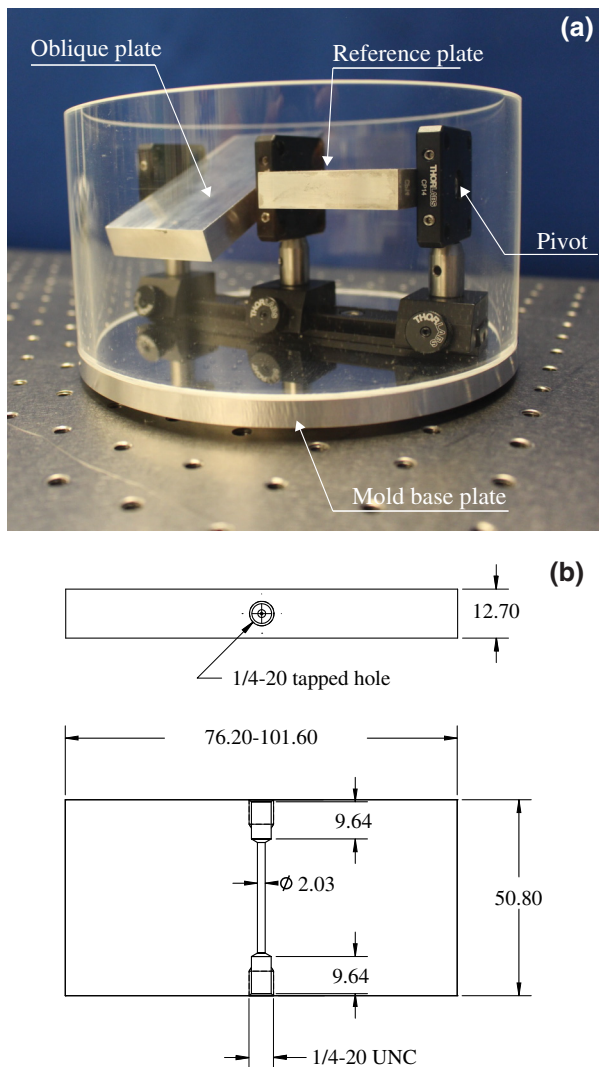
Specimen configuration for freezing experiments. (a) Mold and plate assembly; (b) Plate geometry.
